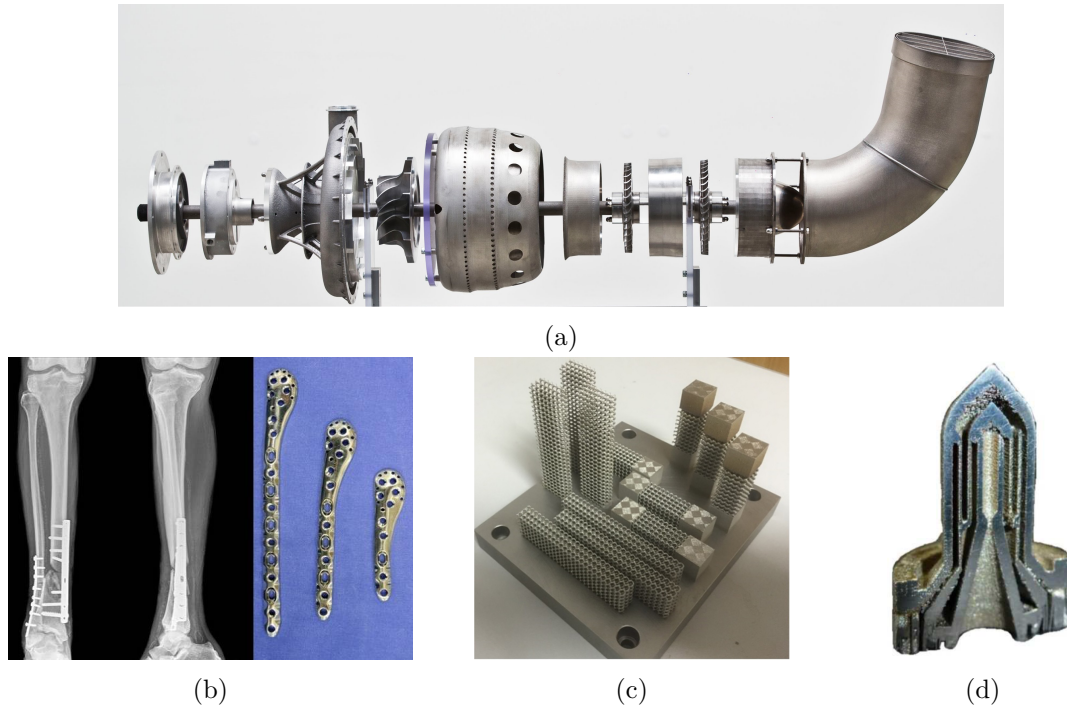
Parts fabricated by SLM: (a) jet engine [25]; (b) titanium orthopedic implant [26]; (c) 316L lattice structure for mechanical tests [27]; (d) 316L resistojet with channels [28].
